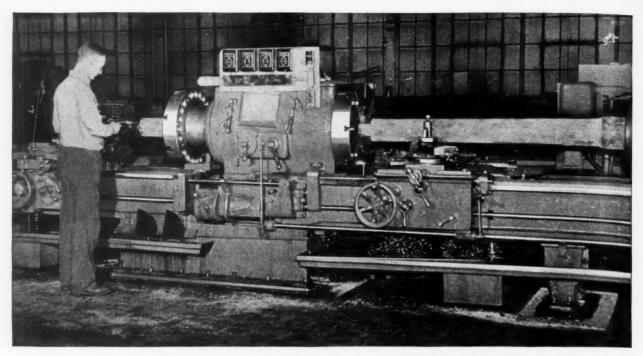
A high-strength alloy-steel forging is rough-turned in one of the initial machining operations performed on gun tubes
